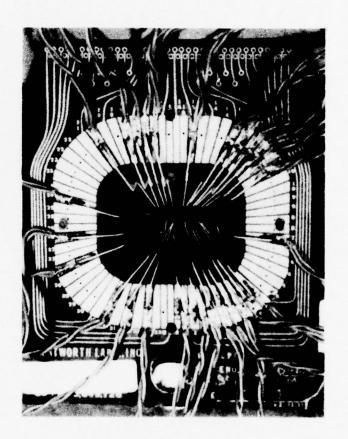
PASSIVE RESISTOR TRIM PROBE AND PROBE CARD
